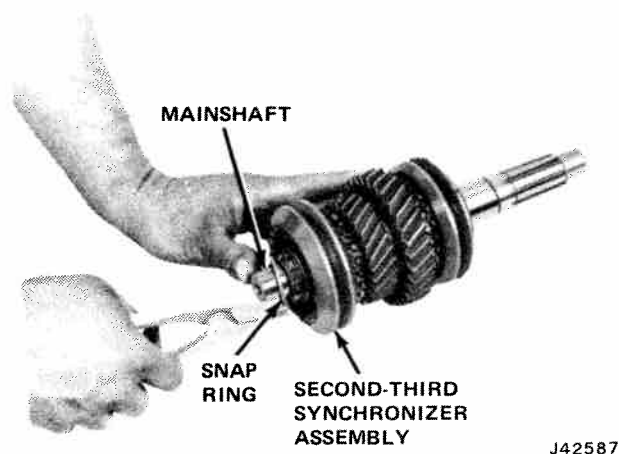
Second-Third Clutch Hub Snap Ring Removal and Installation
